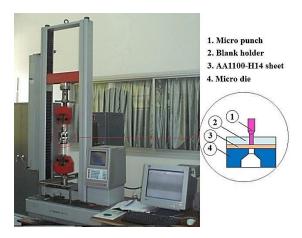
Universal Testing Machine (UTM) Testometric Mico 500 and deep drawing tools
